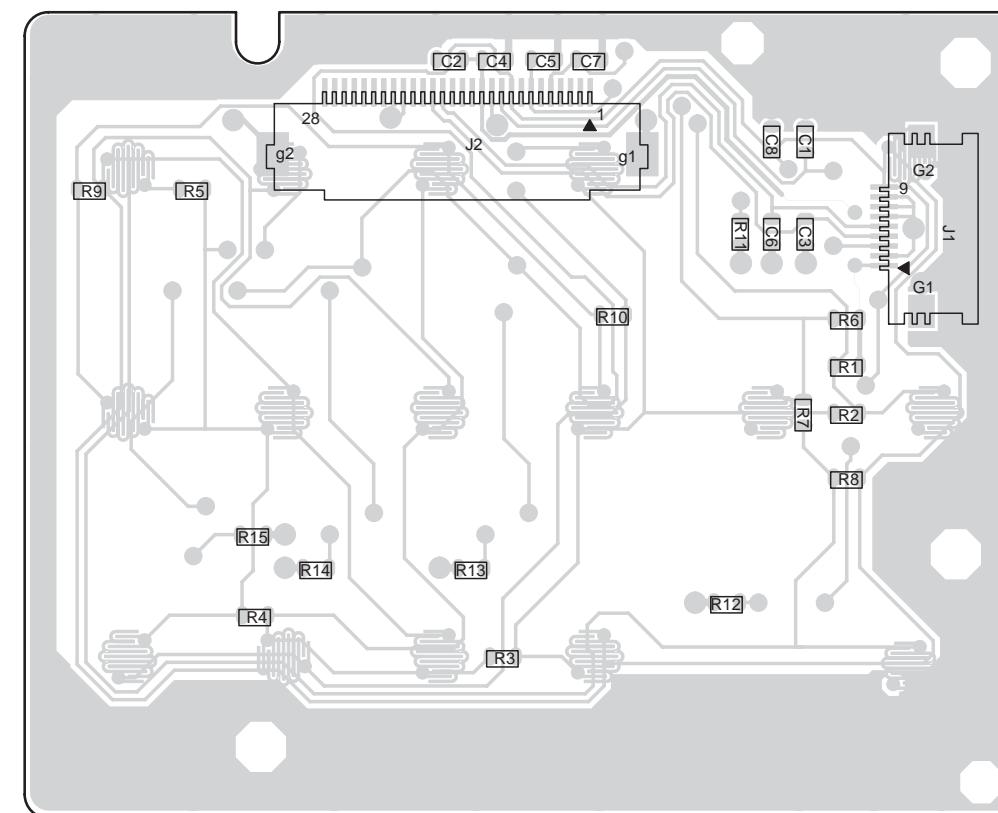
VHF (146-174 MHz) Board Solder Side View
